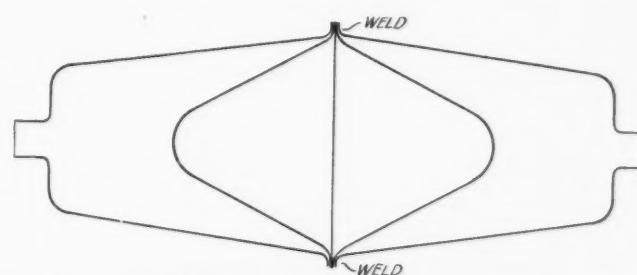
Muffler made up of sheet-metal units, are welded
